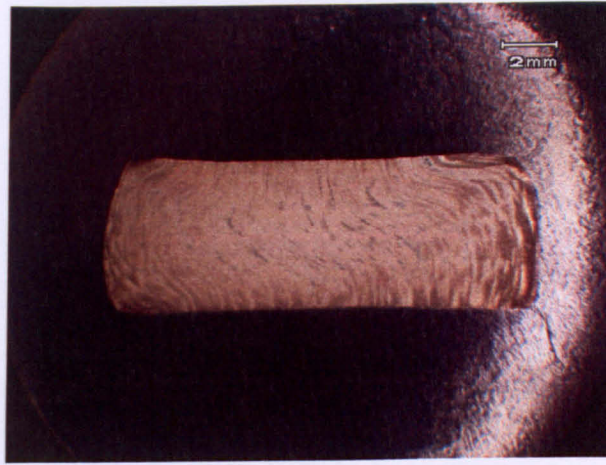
A longitudinal section of deformed cylindrical specimen mounted in Bakelite.
